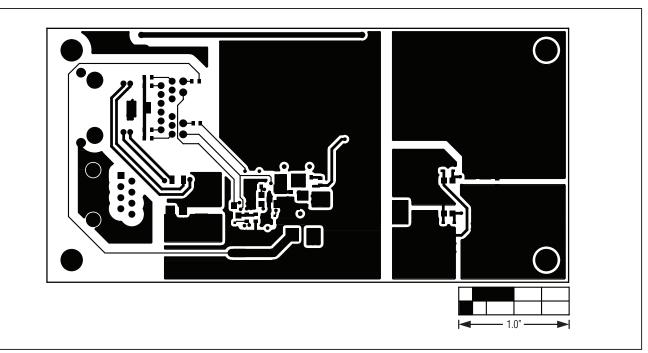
MAX5974A EV Kit PCB Layout—Solder Side
